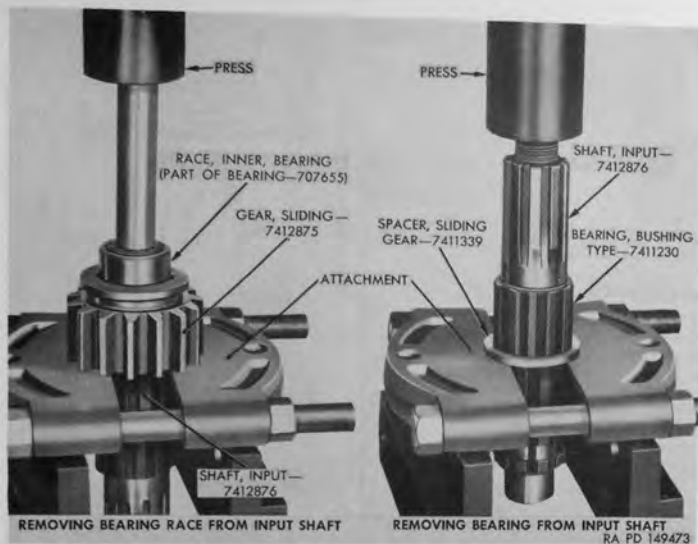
Removing bearing race and input shaft gear bearing from input shaft with attachment 41-A-345-328 (part of puller set 41-P-2905-60).
